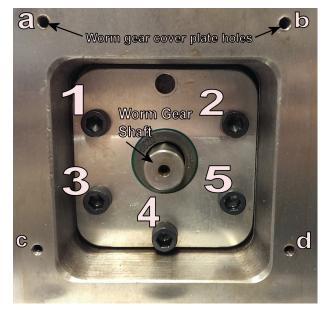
Holes a, b, c, & d cover the worm gear shaft. Screws 1, 2, 3, 4 & 5 hold worm gear shaft in place.
